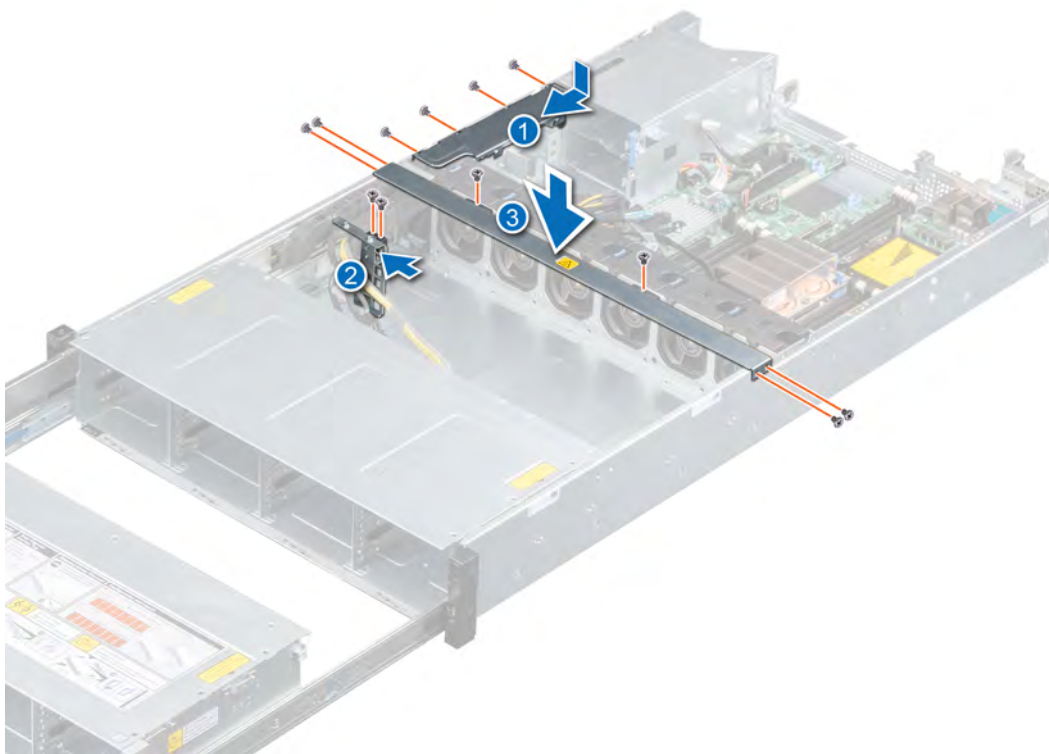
Replacing the support bar, cable chain top cover and connecting the bay 2 backplane bracket from the cable chain assembly.
